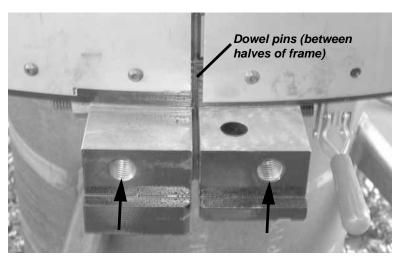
The hinge side of the frame has two threaded holes for attaching the hinge.
